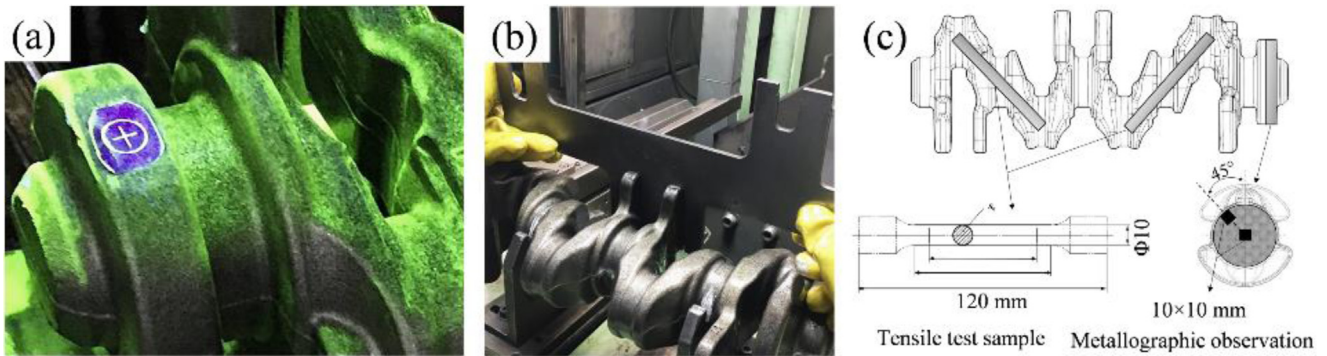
Quality inspection of the forging: (a) magnetic particle testing, (b) dimensions measurement, and (c) performance testing.
